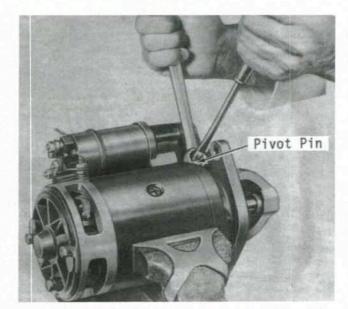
Turn pivot pin as required to adjust drive pinion clearance.
